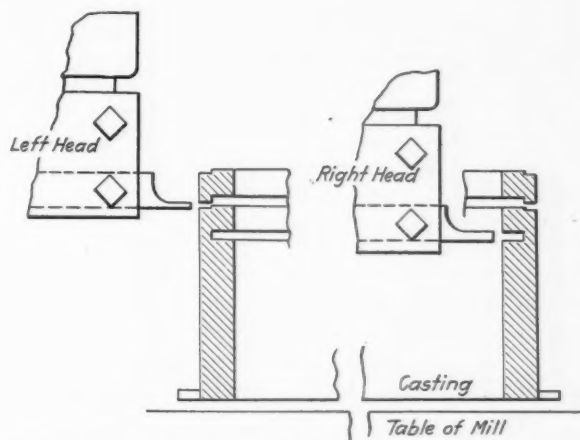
Method of Cutting Off Z-Shaped Packing Rings for Piston Valves
